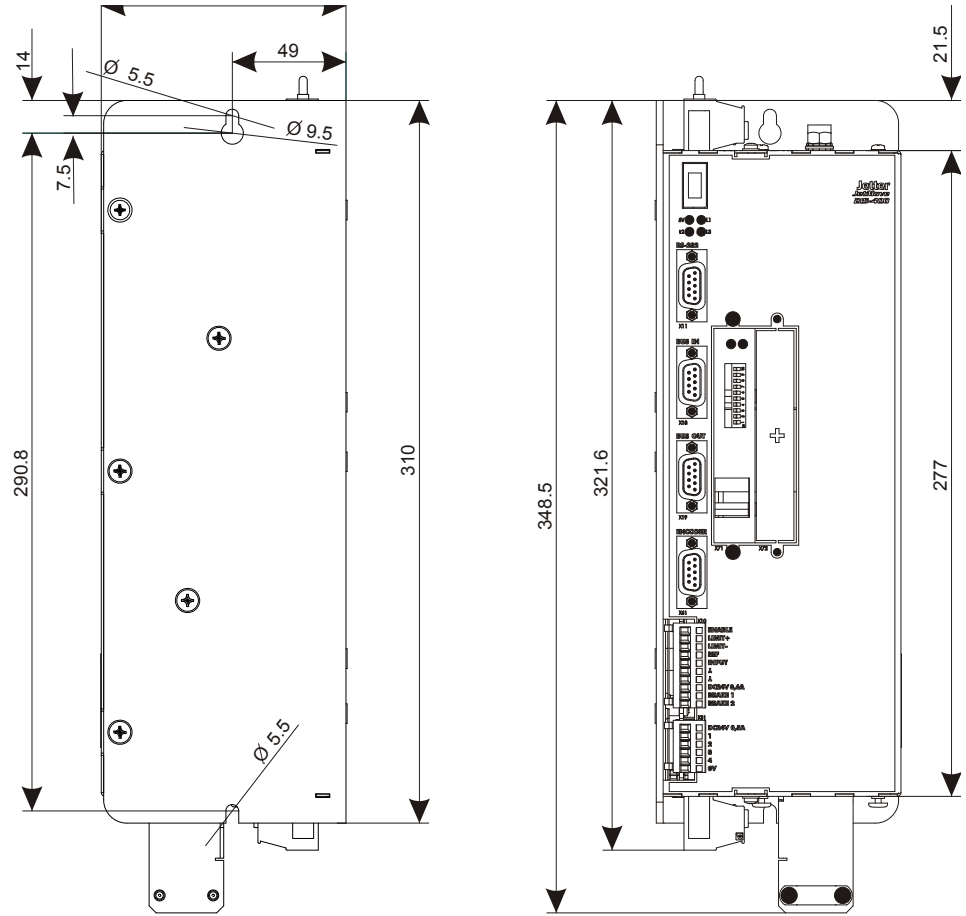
Rear and front view of the JetMove 215B-480 enclosure with mounting holes
